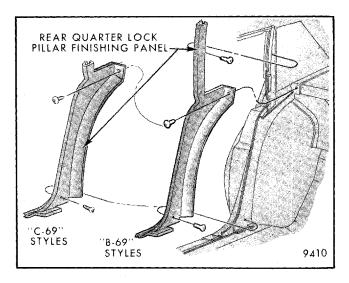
Quarter Trim Assembly Attachment - B and C-69 Styles
